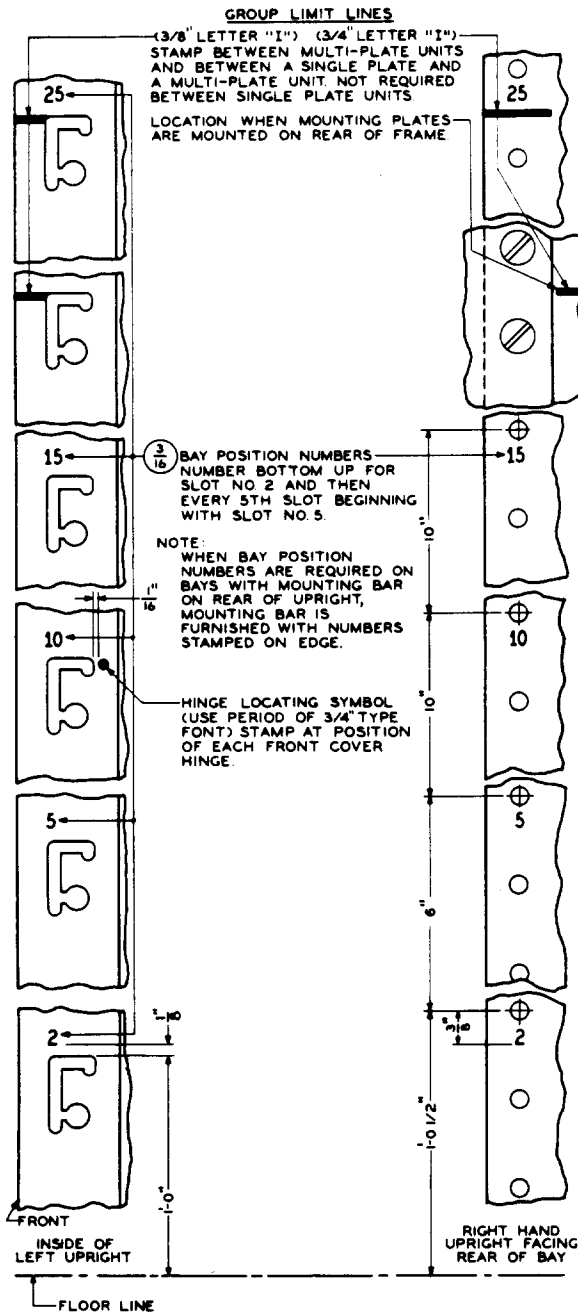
Frame Uprights on Box-type Frames — Hinge-locating Symbol and Bay (Mounting Plate) Position Numbers
